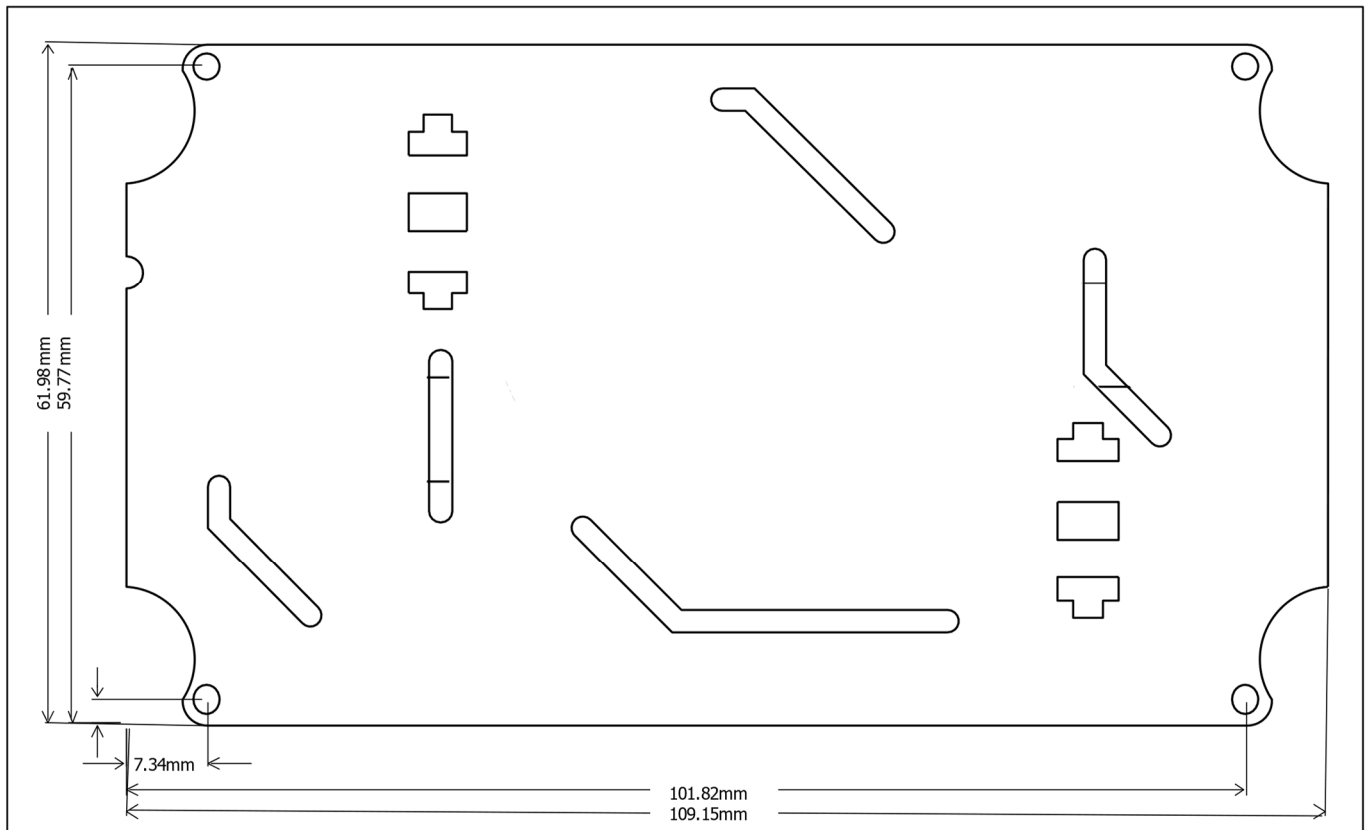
Technical Dimensions 2SP0215F2Q0C Gate Driver Board Bottom View
